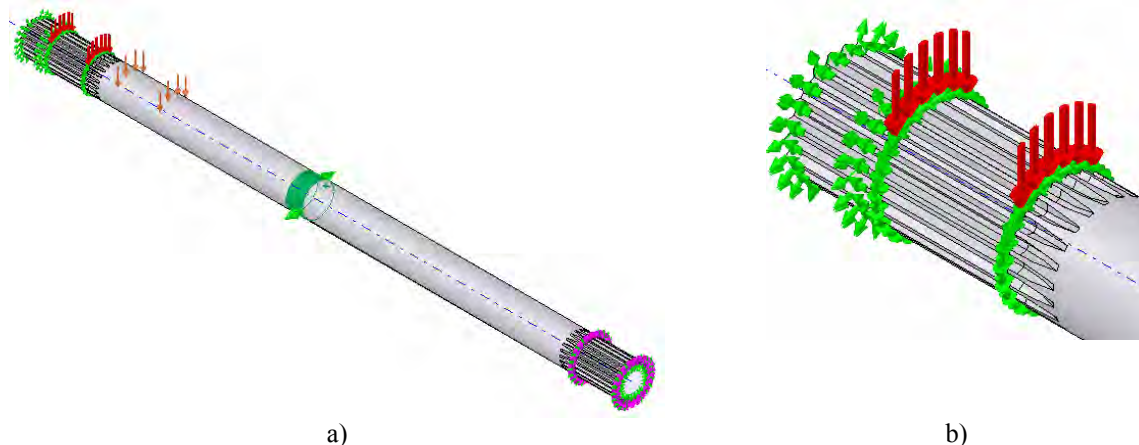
Model of the reducer shaft: a) loading and constraints of shaft; b) spline part of shaft that is in contact with the central gear.
